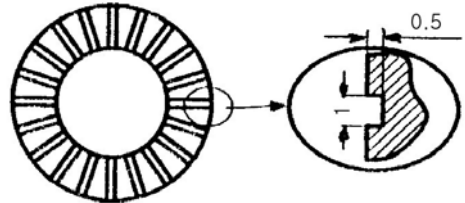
Shape and dimension of electrochemical crevice corrosion test specimen (unit: mm).
